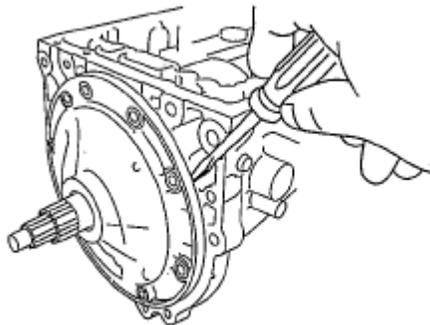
Removing Oil Pump Using Flathead Screwdriver
